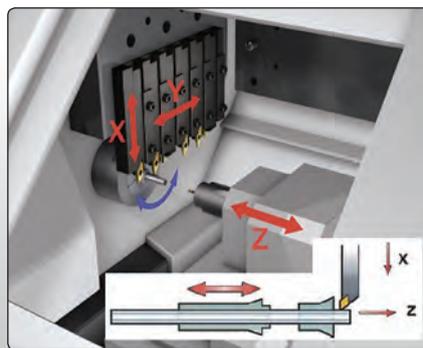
Workpiece exchange principle at long rotative automatic machines [Sandvik Coromant]
